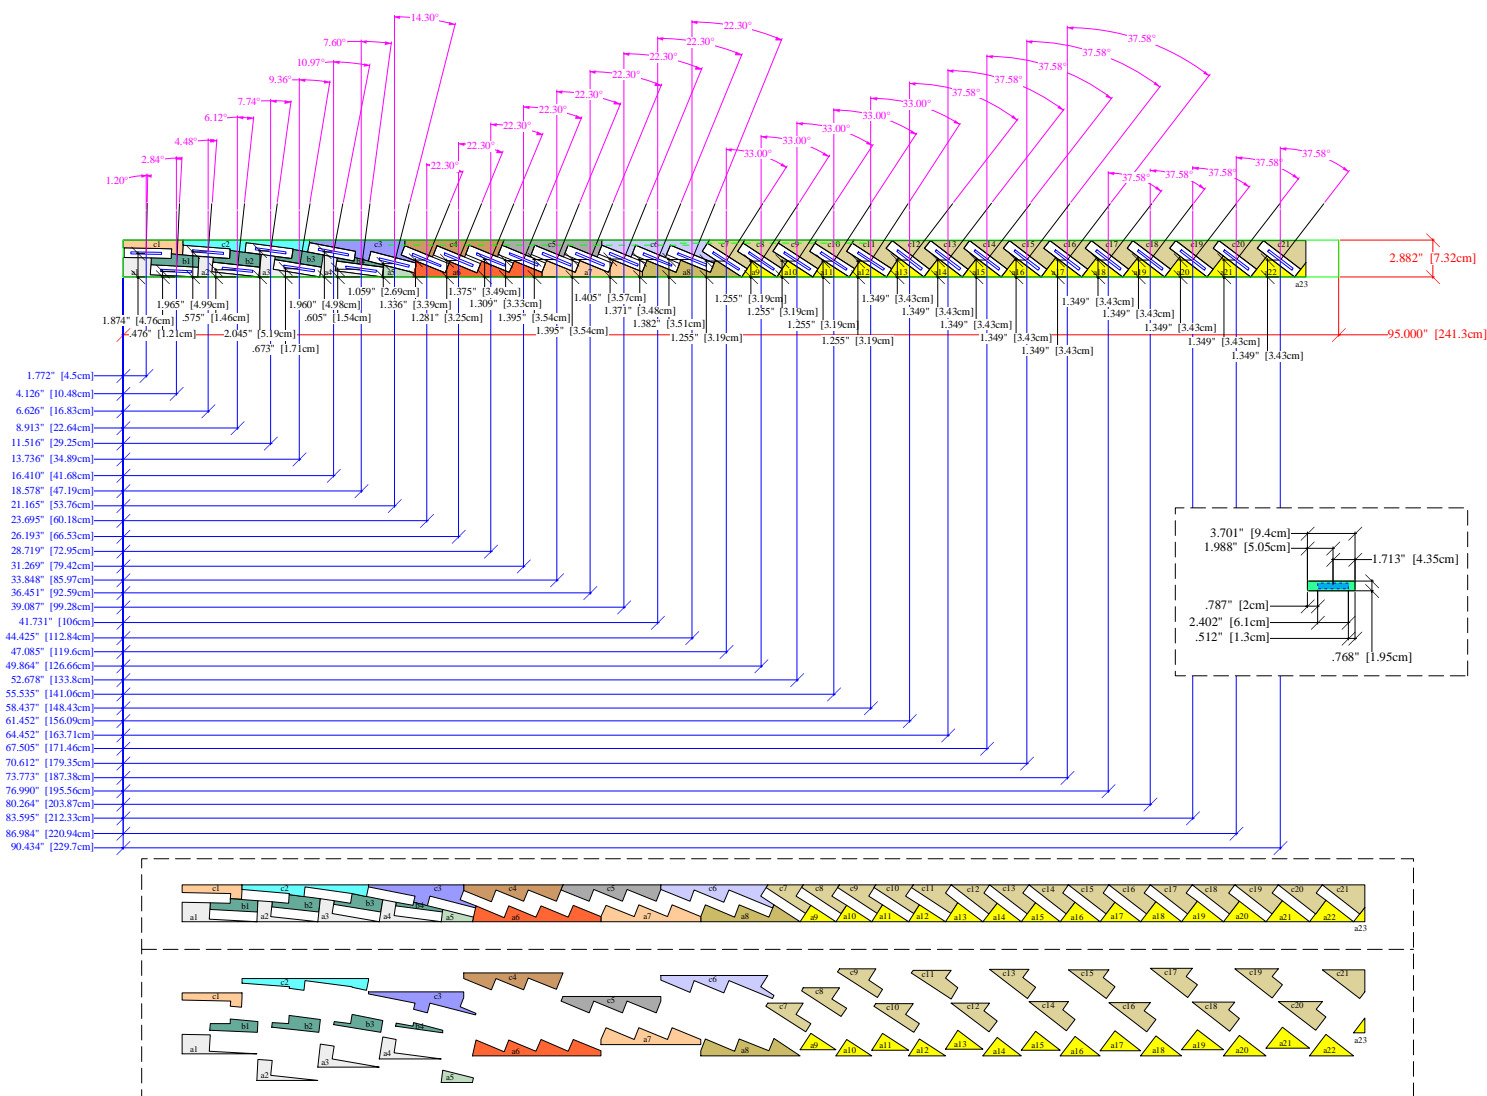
A dimensioned side view of the TOFr tray indicating the detector positioning.
